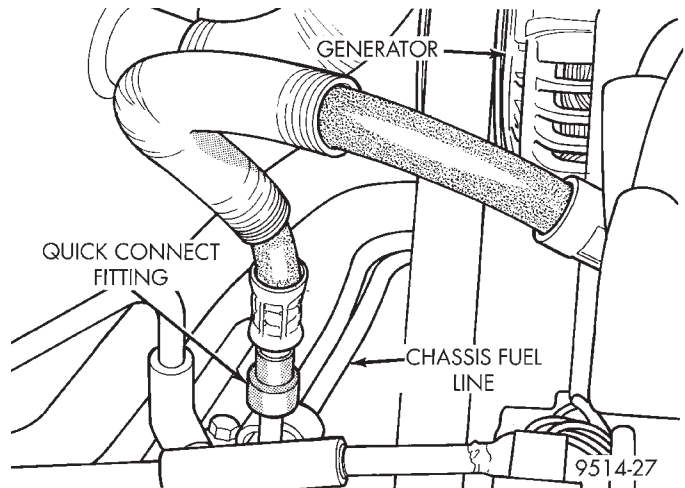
Quick Connect Fuel Fitting to Fuel Line
